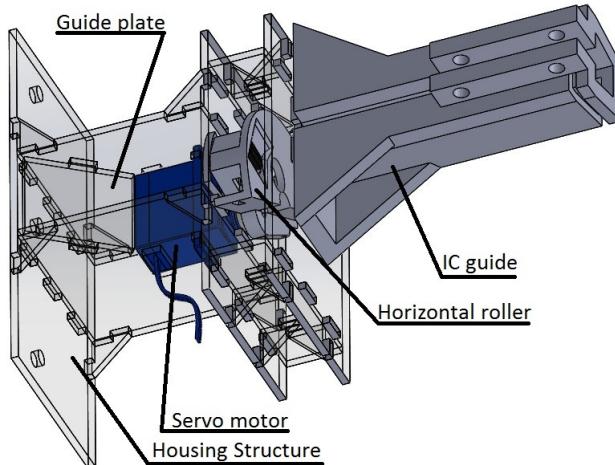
Horizontal Roller and Housing Delivery mechanism.
